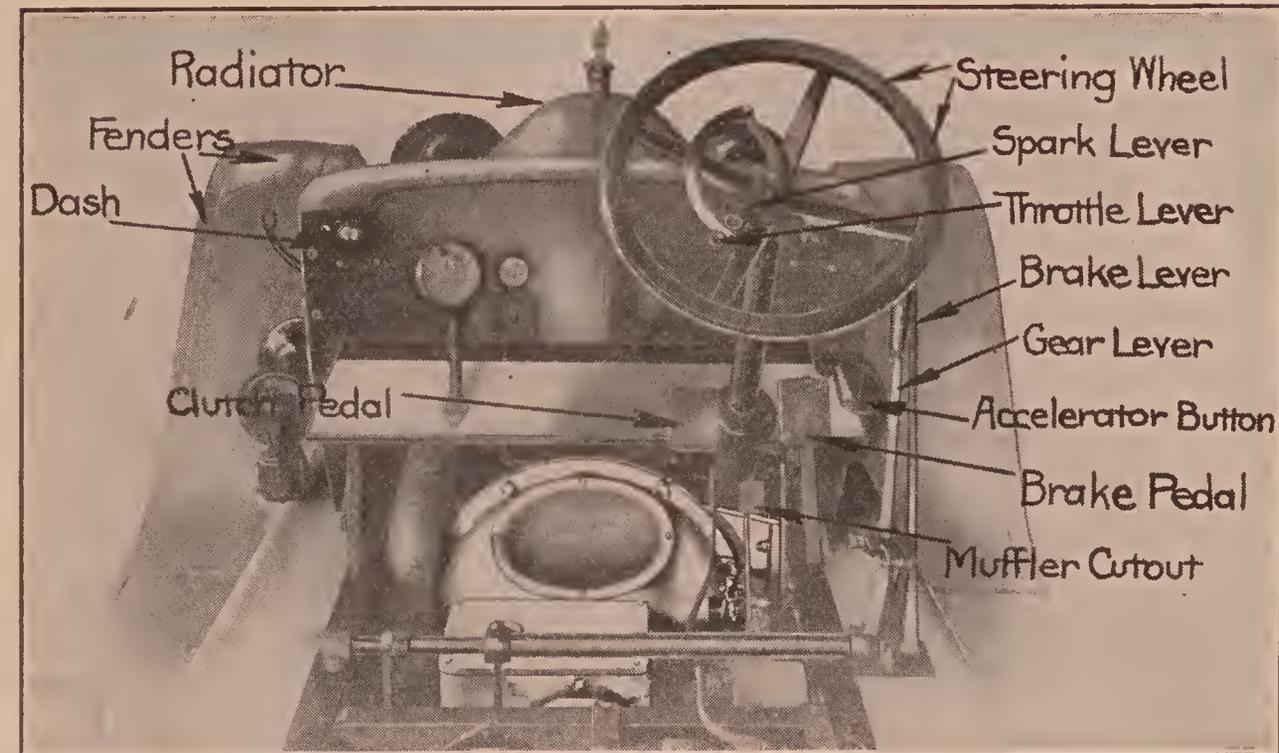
Another car seen from the rear, showing the control parts with the dash-board in place. Two additional control parts will be noted over Fig. 1.
